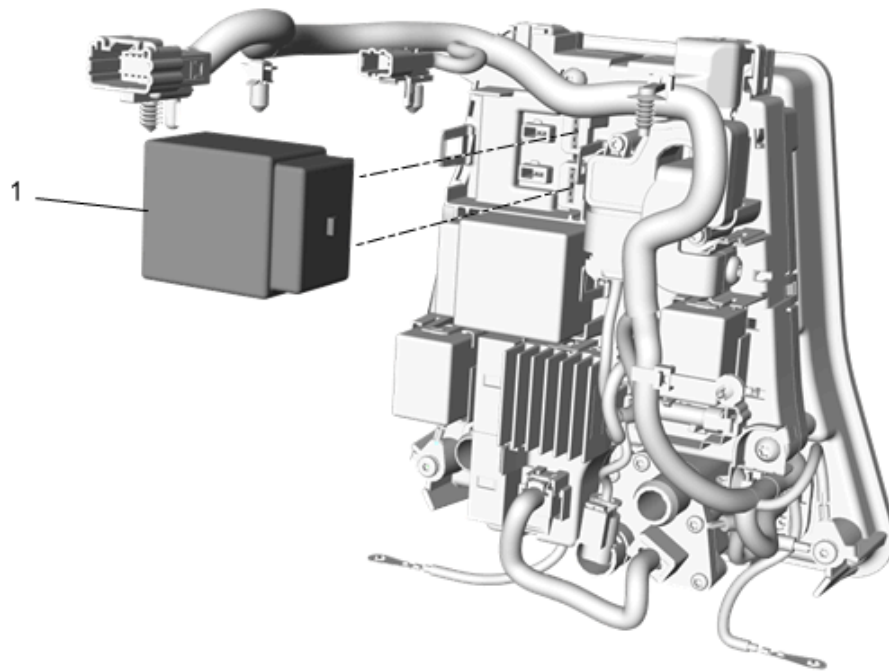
Drive Motor Battery Positive High Voltage Contactor Relay
